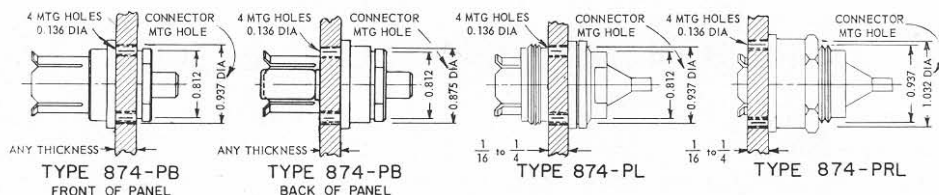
Mounting dimensions for Type 874 Panel Connectors.
